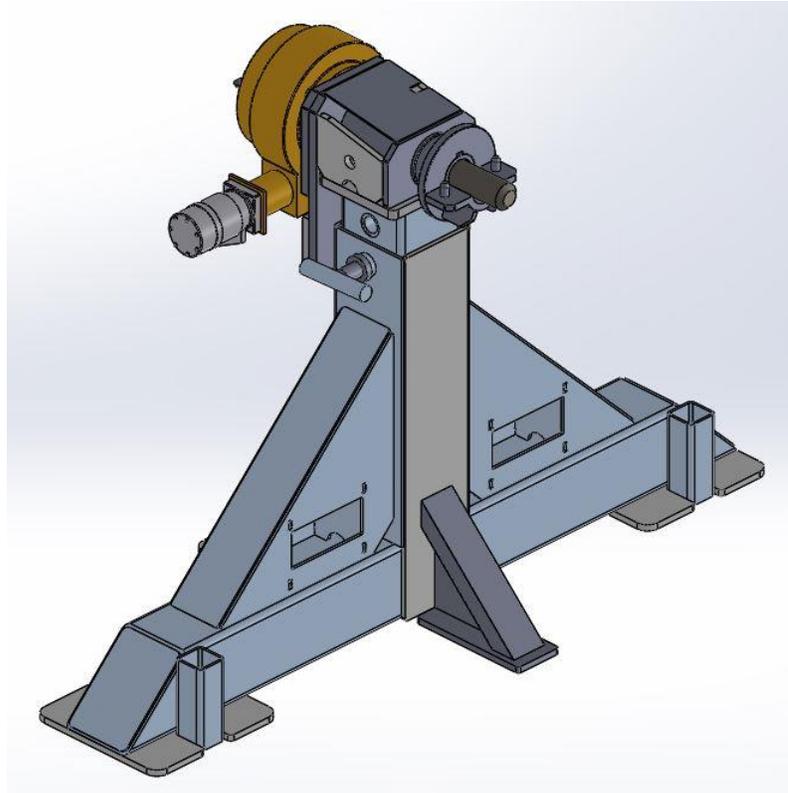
Final Design of Quick Change, Hydraulic Powered Drive End A-Stand, Inboard Side
